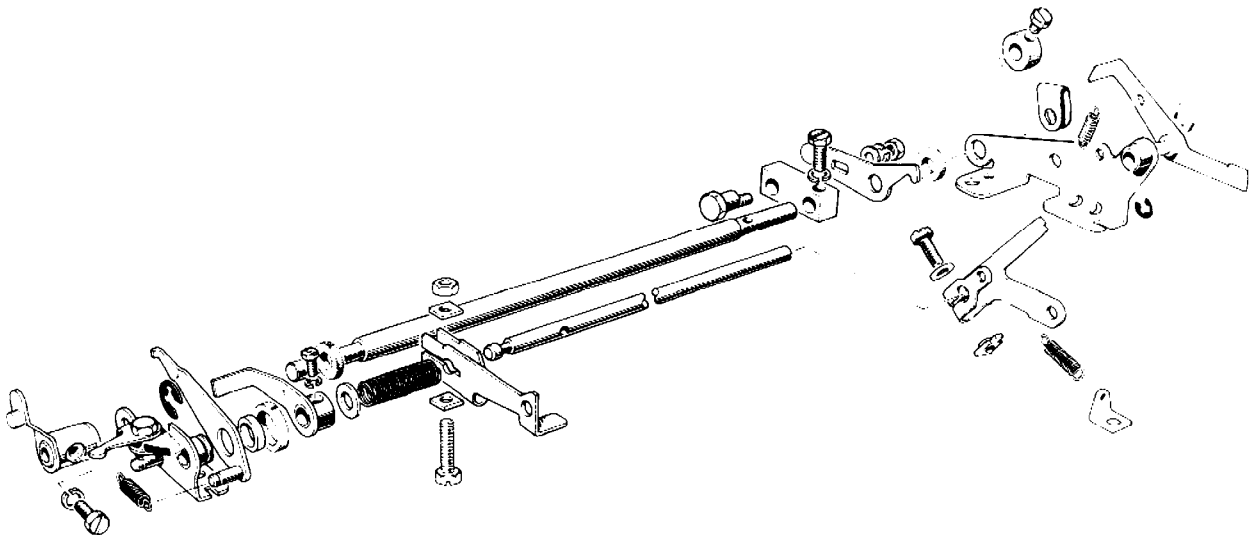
TWO-COLOUR AND LINE-FEED ASSEMBLY
